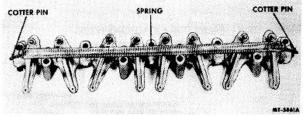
Method of Holding Rocker Arm Assembly Together for Installation
